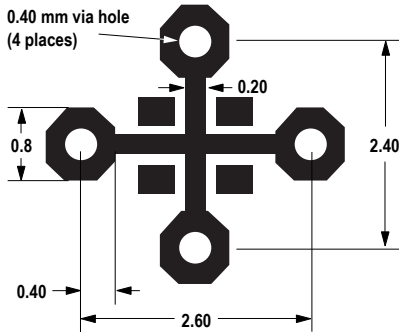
PCB Pad Layout, High Isolation MiniPak (dimensions in mm).
